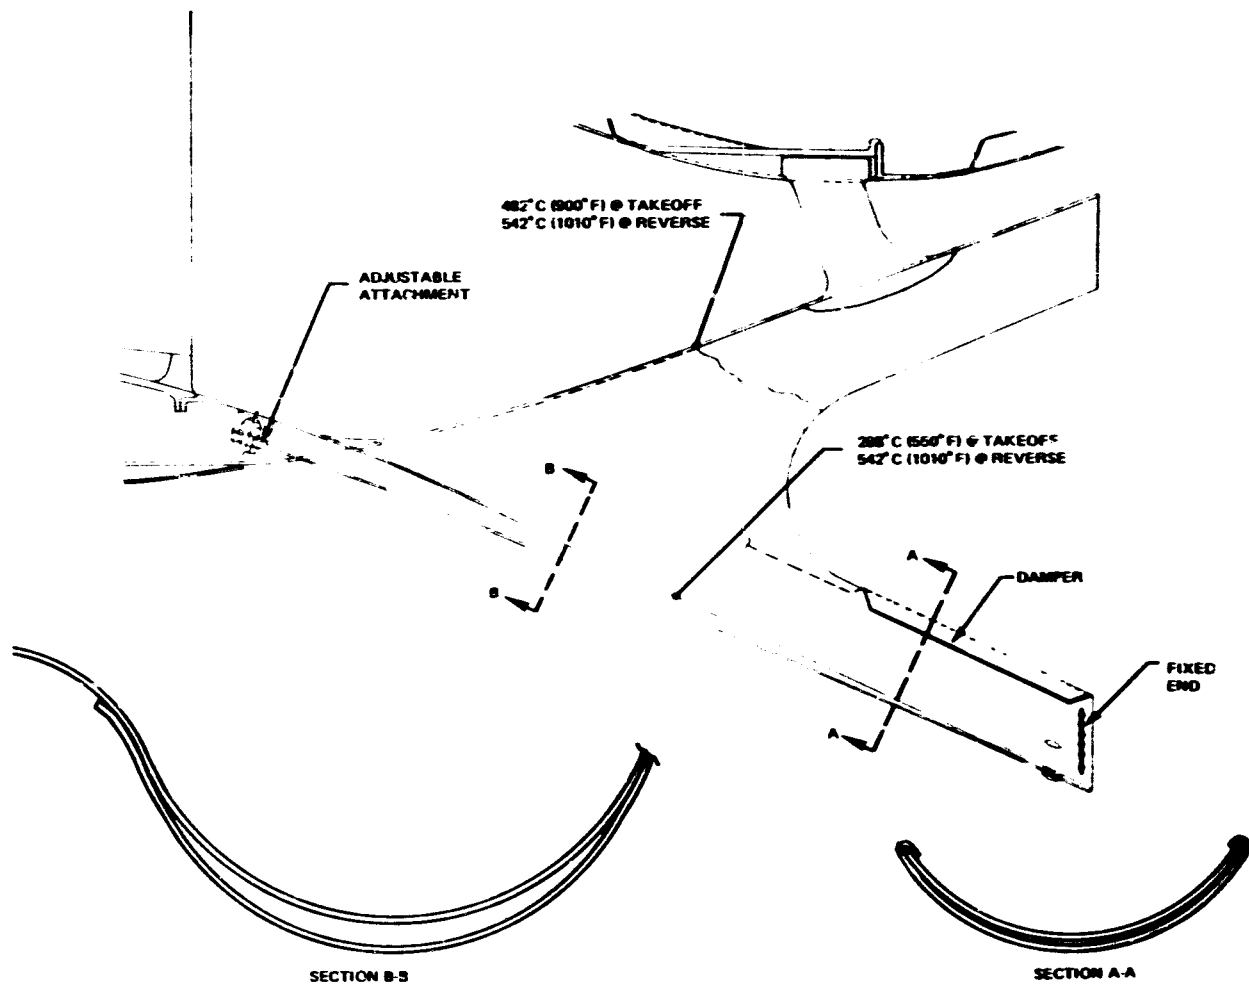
Mixer Outer Lobe Damper. Arrangement shows configuration selected to control vibrations.
